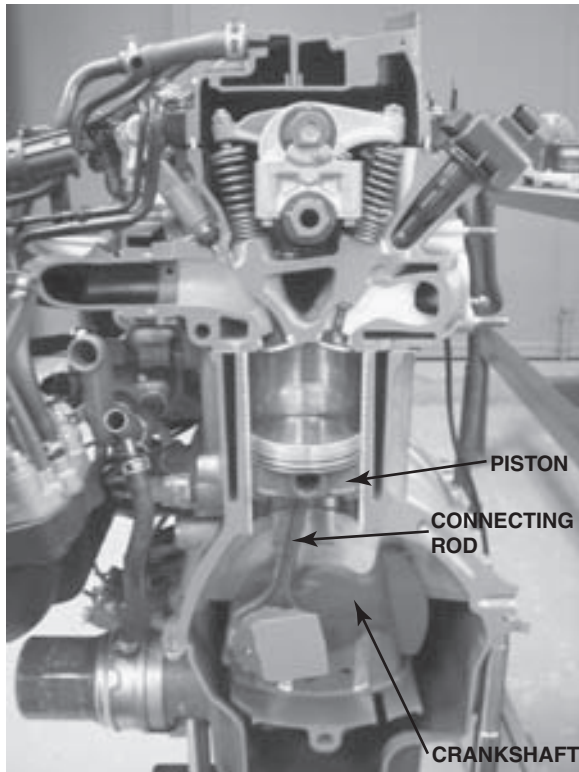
Cutaway of an engine showing the cylinder, piston, connecting rod, and crankshaft.
